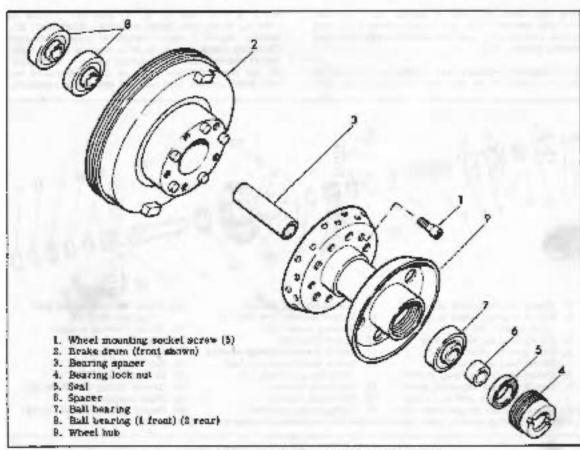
C-3A. Wheel Hub (1987 and later) - Exploded View
